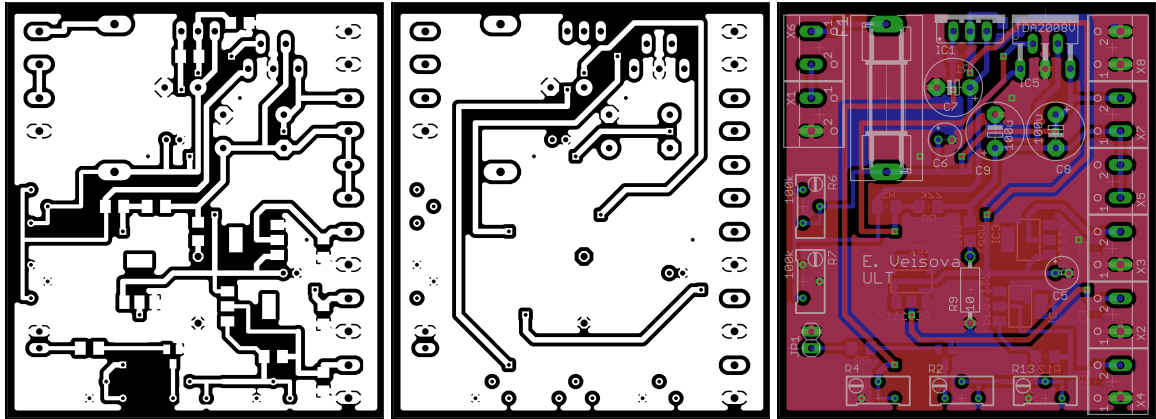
PCB bottom layer Figure 4.56: PCB top layer Figure 4.57: PCB design layer
